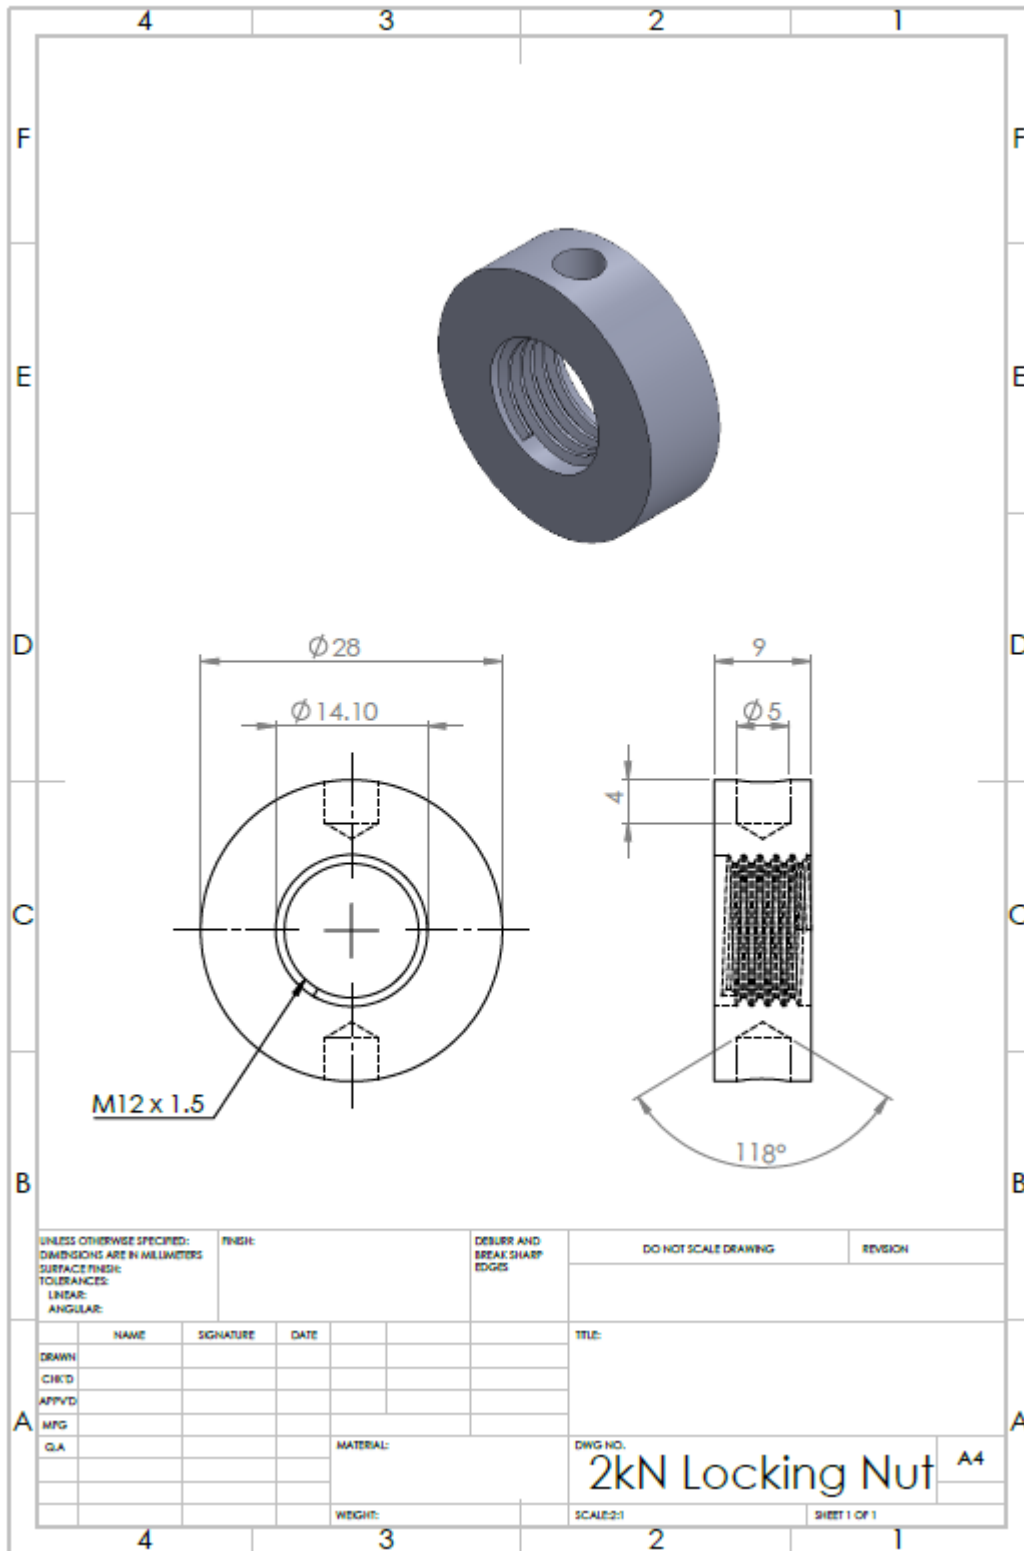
Technical drawing of the locking nut for the 2 kN platen
